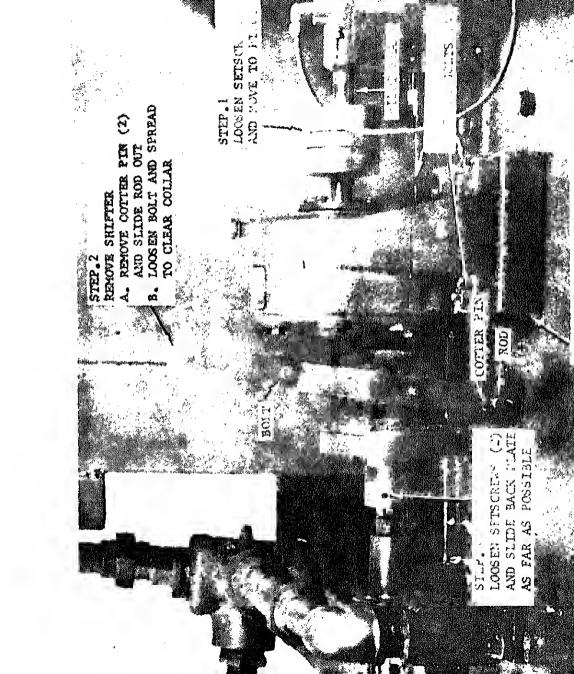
Flexible compling, removal, disassembly, installation and assembly.
